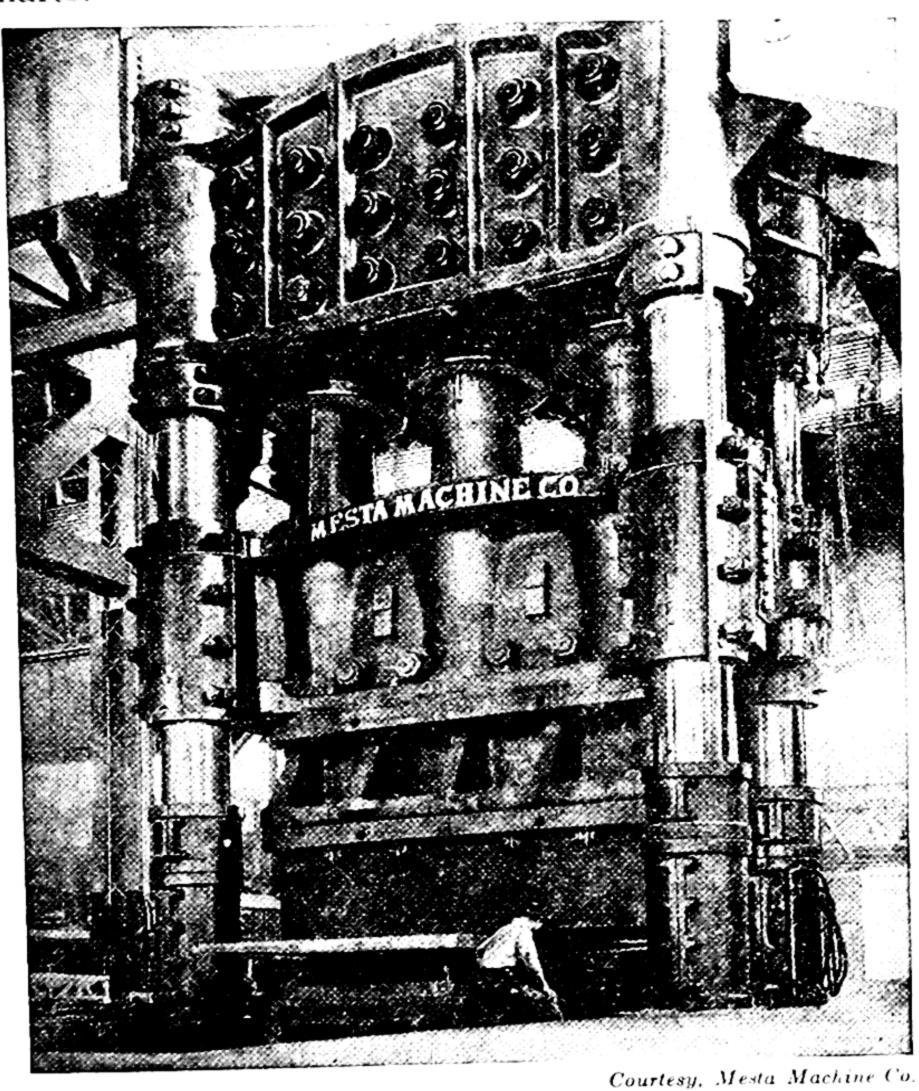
Heavy machinery is used in cutting and shaping steel.
